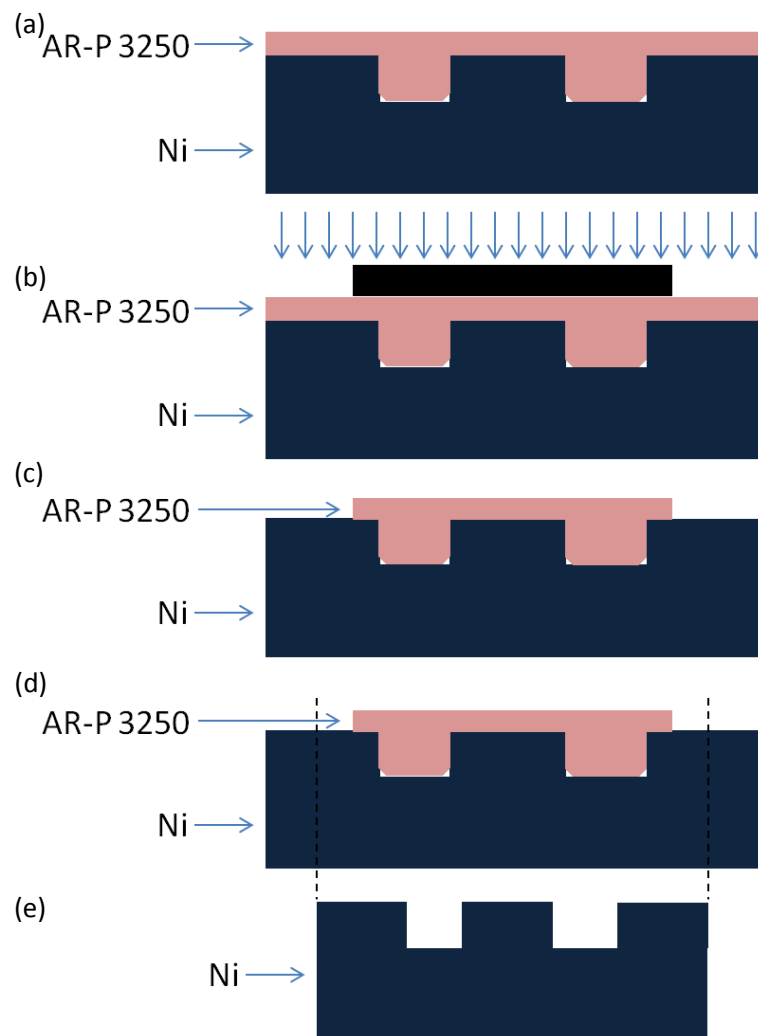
Procedures from coating protection layer to side cutting (a) coating of AR-P protection layer, (b) UV exposure, (c) development, (d) wire spark erosion cutting to obtain the desired size, (e) mold cleaning with acetone
